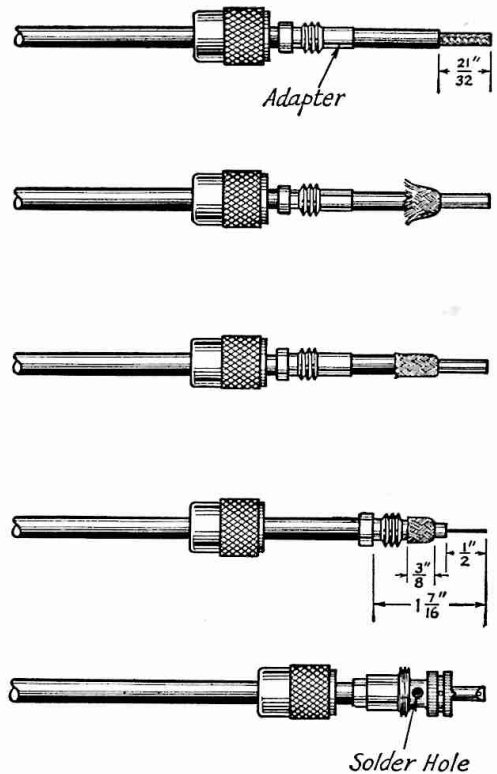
Method of assembling 1/4-inch cable, Amphenol Type 83-1SP (PL-259) plug and adapter.
